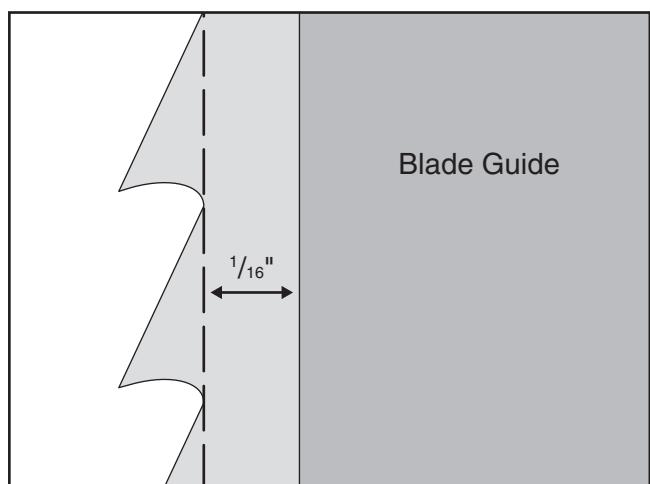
Blade guides positioned approximately $\frac{1}{16}$ " behind tooth gullets.
